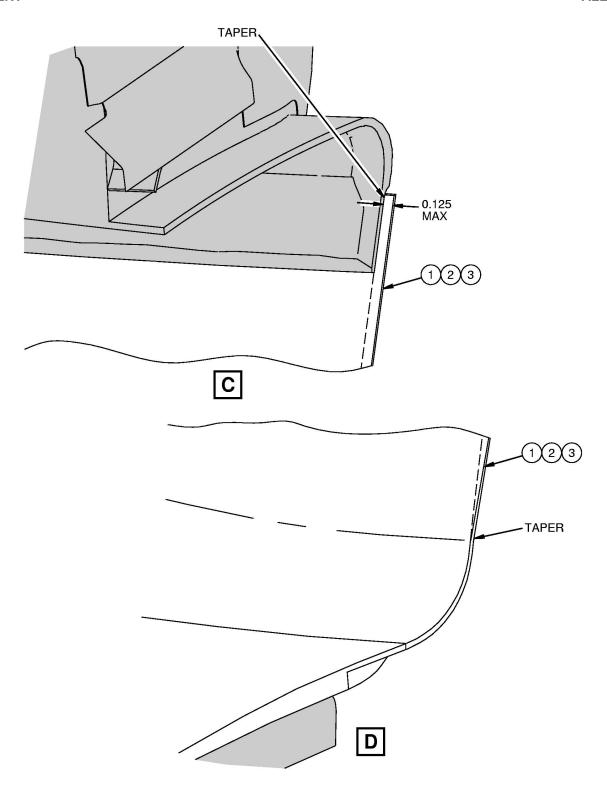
RIGHT TR HALF INNER WALL FORWARD EDGE INSPECTION AND TRIMMING (SHEET 3 OF 4)
